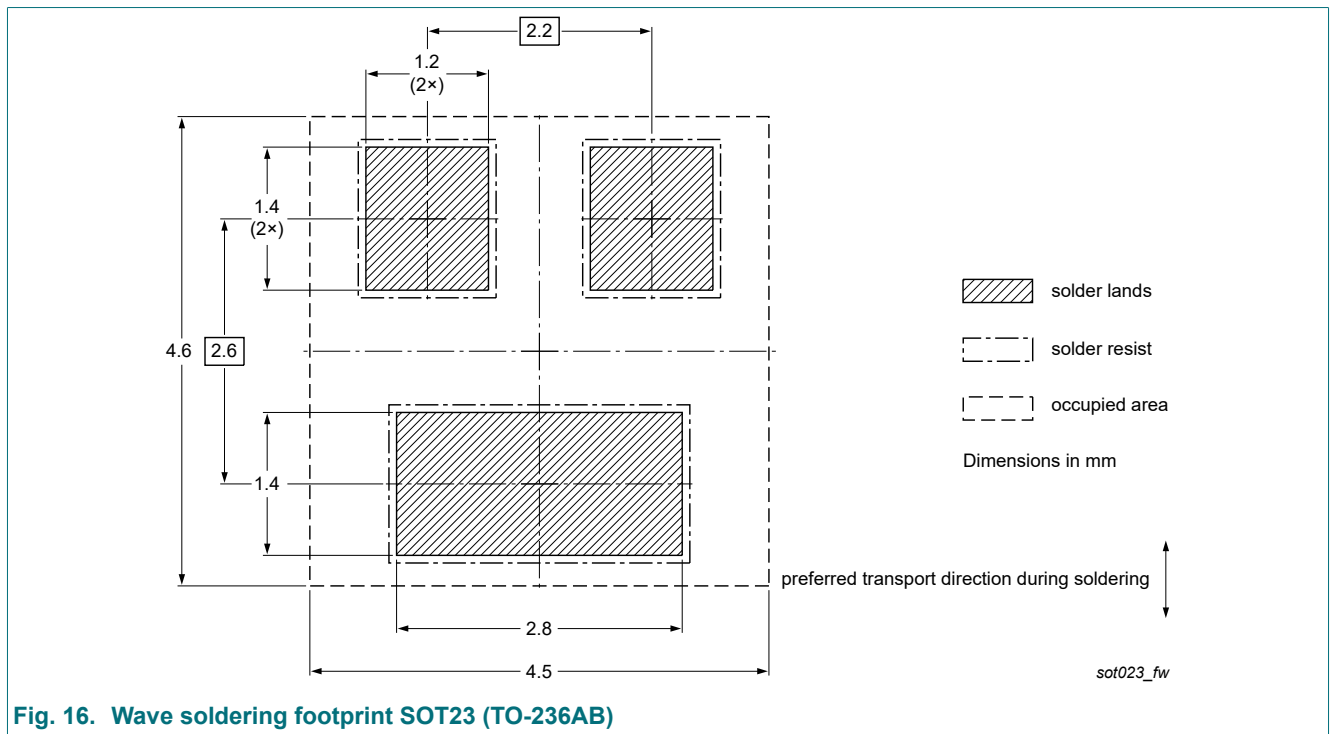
Wave soldering footprint SOT23 (TO-236AB)
